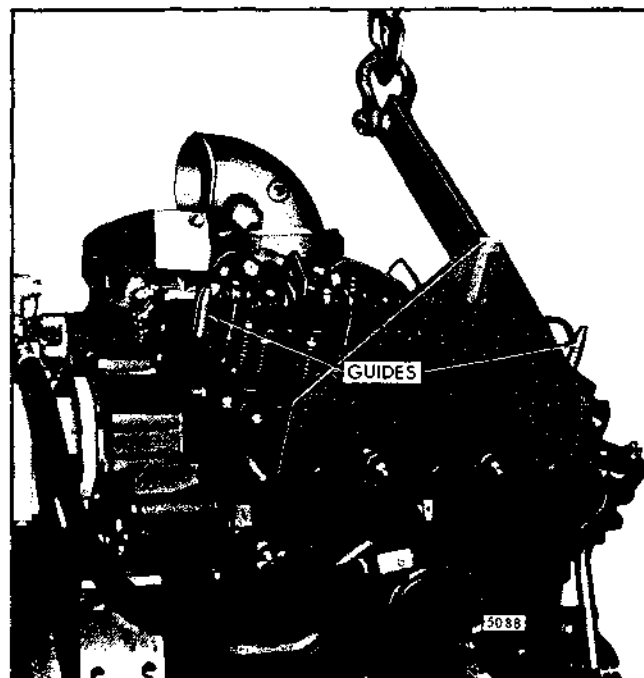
Lifting Cylinder Head Assembly Off Cylinder Block with Tool J 22062-01
